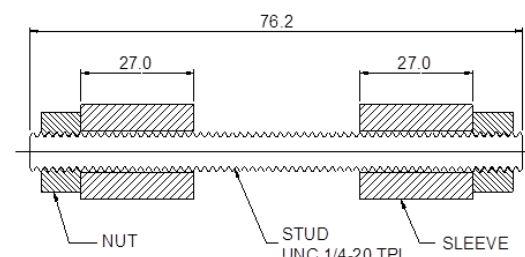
Testing Device (dimensions in millimeters, except thread).
